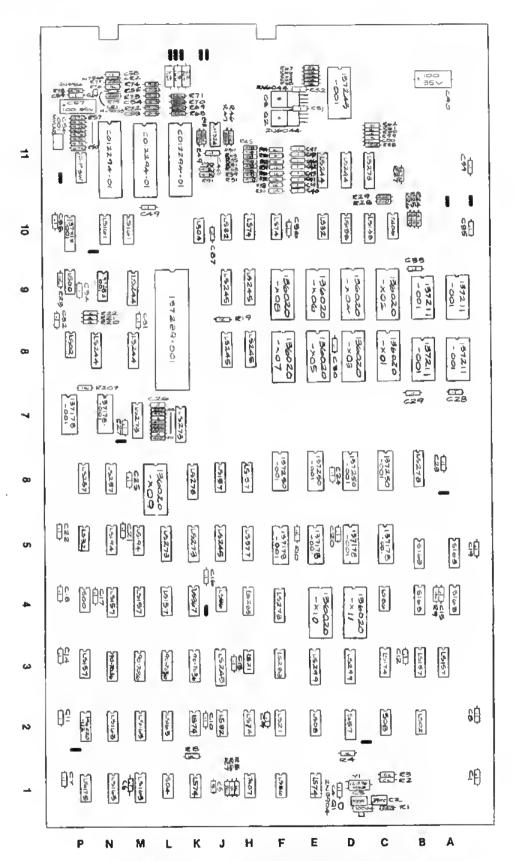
Food Fight Game PCB Assembly A039445-21 B
